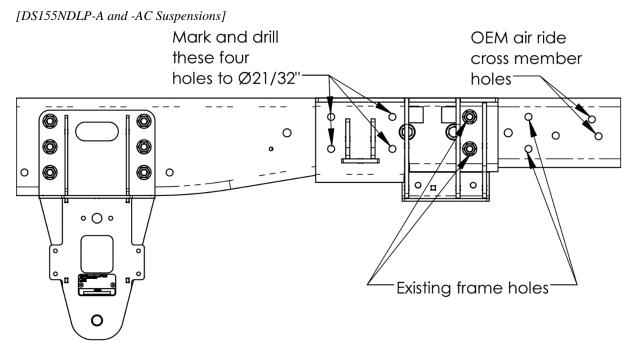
[DS155NDLP-A and -AC Suspensions Only] Driver side template location for upper strut mount frame drilling
